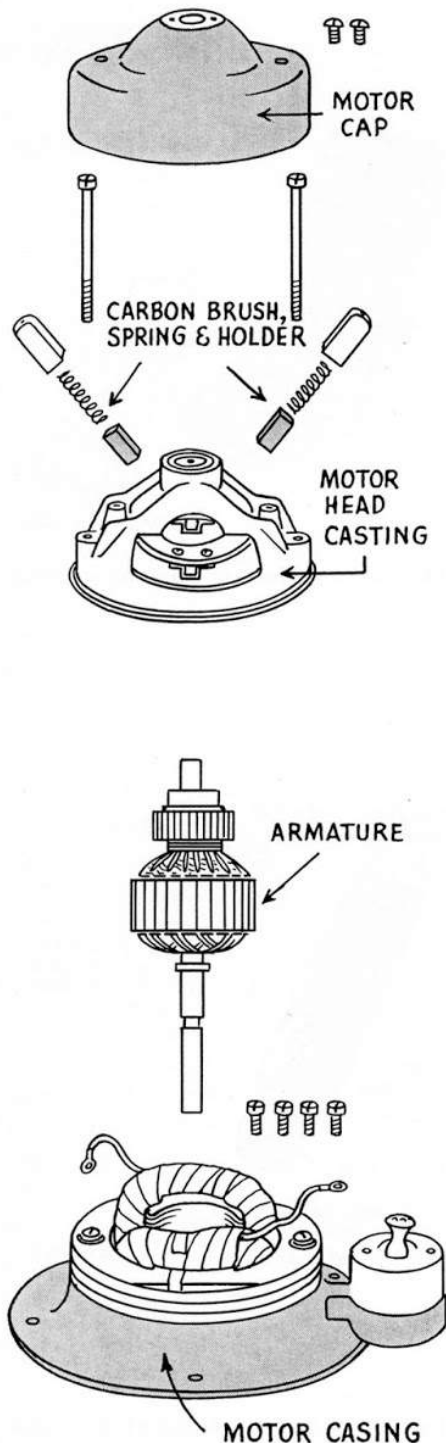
Type of motor with motor casing and motor bottom plate cast in one piece
